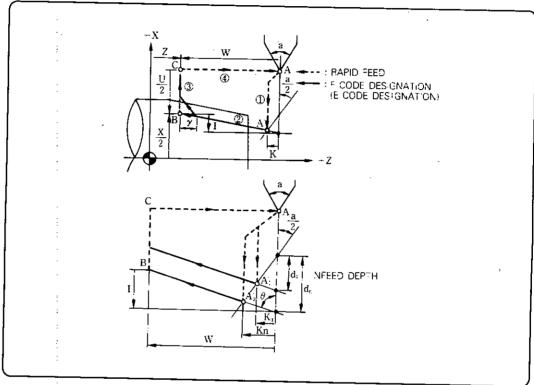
Taper Thread Cutting Cycle (Thread Angle Cutting)
